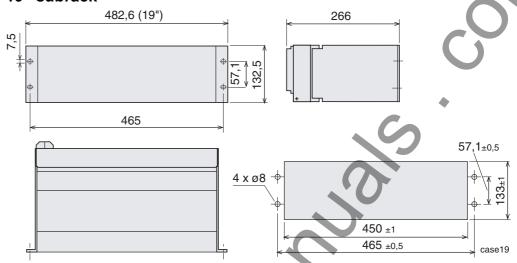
Dimensions (in mm) and panel cut-out for flush mounting
